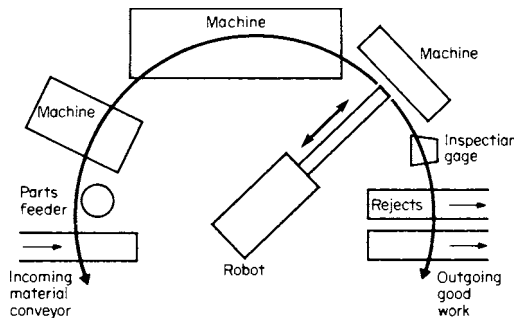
Robot work cell. Robot is positioned to service a number of machines clustered about it.
